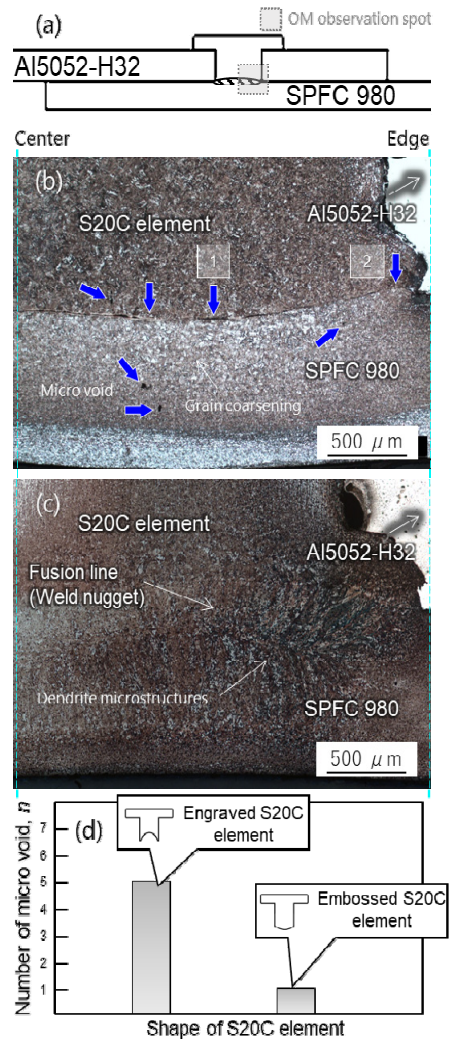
Microstructure investigation results (a) Schematic illustration of optical microscope image, (b) welding interface of engraved S20C element used spot welding specimen and (c) welding interface of embossed S20C element used spot welding specimen, and (d) its micro-void frequency
